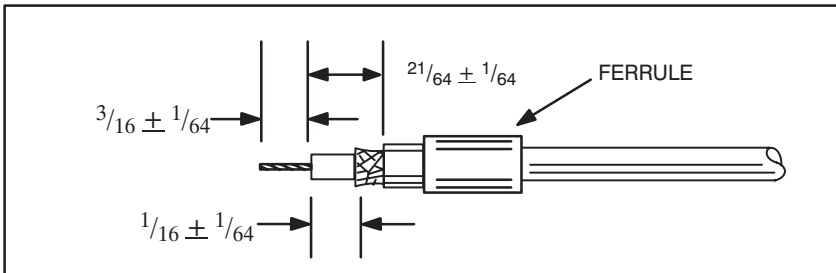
RG-59/U (Belden 9259) Cable Stripping Dimensions
